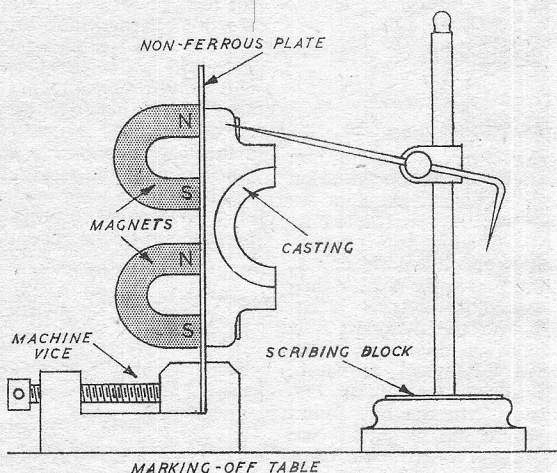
Showing how magnets may be used to hold iron castings for marking-out
